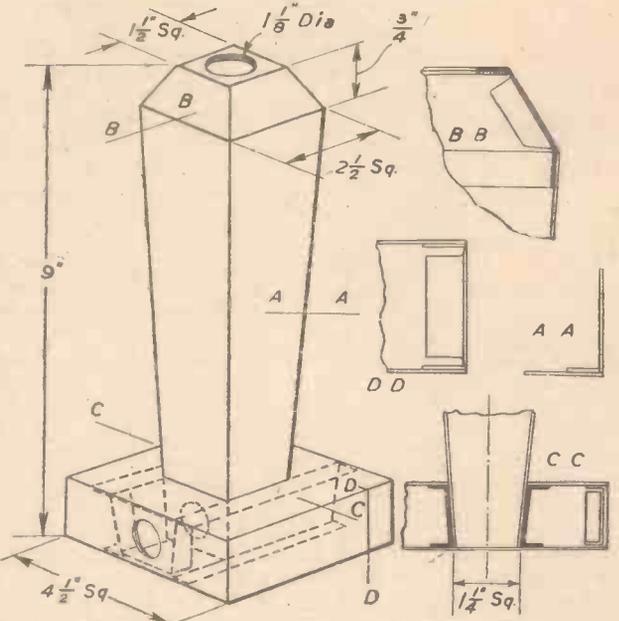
A design for a reading lamp in tinplate, and details of construction.
